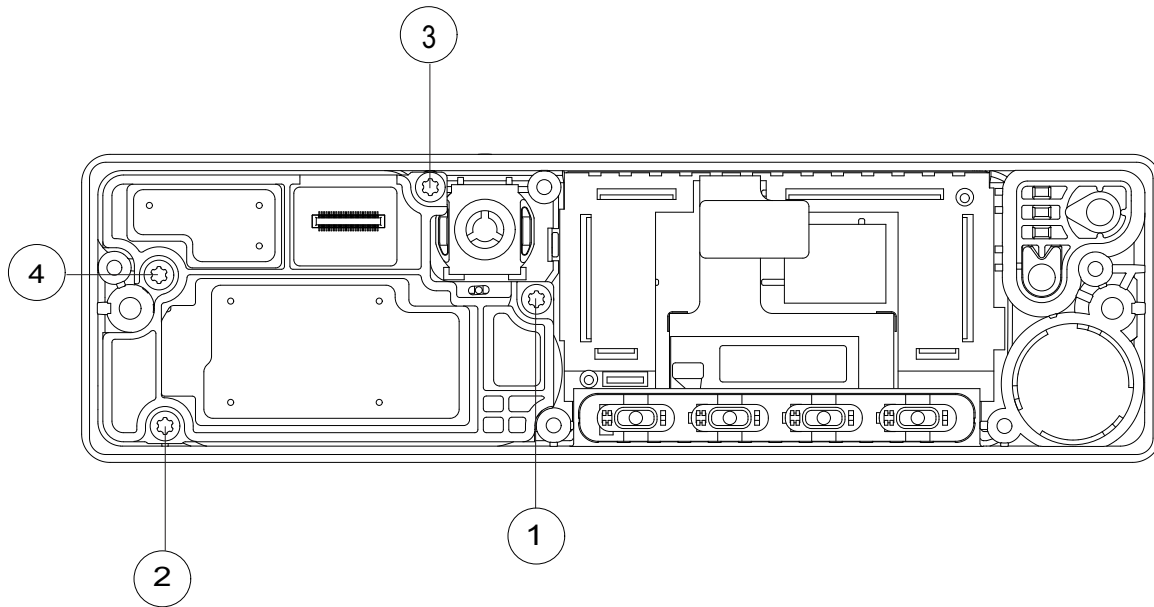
Bluetooth PCB Retention Screw Sequence
